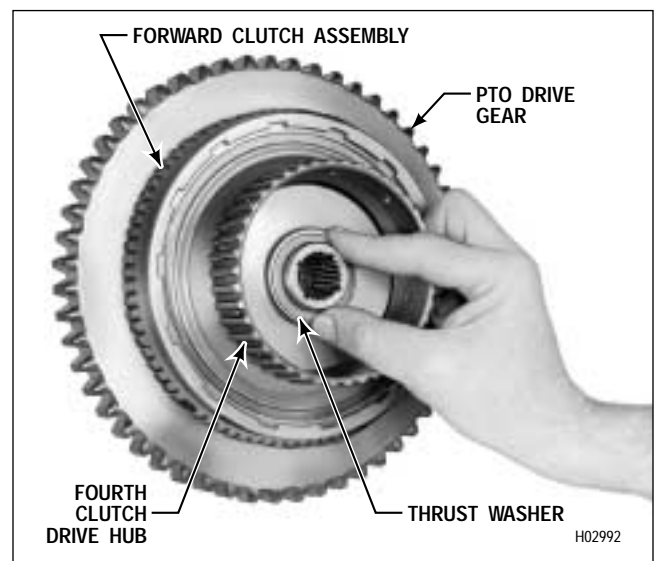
Installing Thrust Washer at Rear of Forward Clutch Hub
